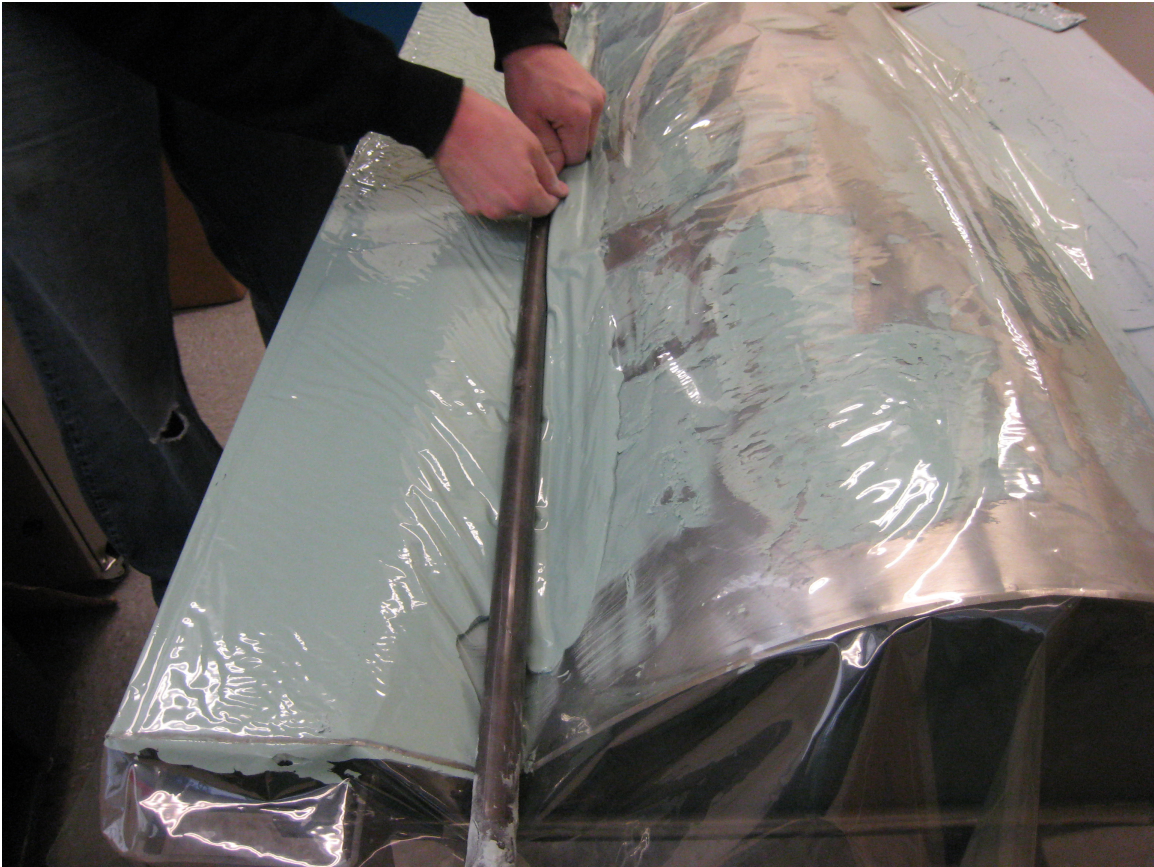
Mold filler applied to create final surface using ends of frame as a thickness gauge.
